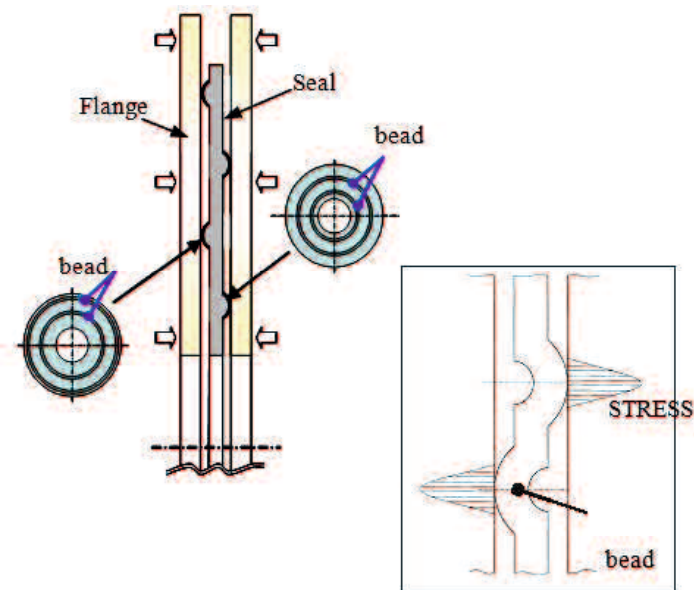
Prevent leakage mechanism of the gasket (Adapted from [14])
